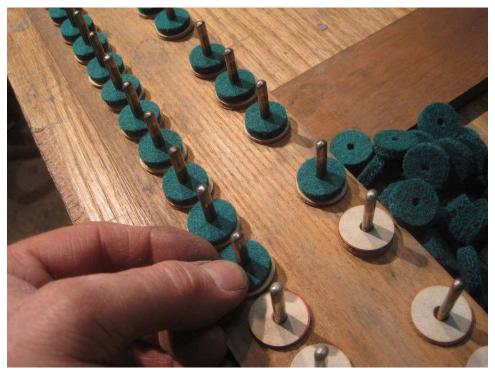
After cleaning the entire key rail assembly, the old front rail felts are removed and replace with a matching set of new felts.
